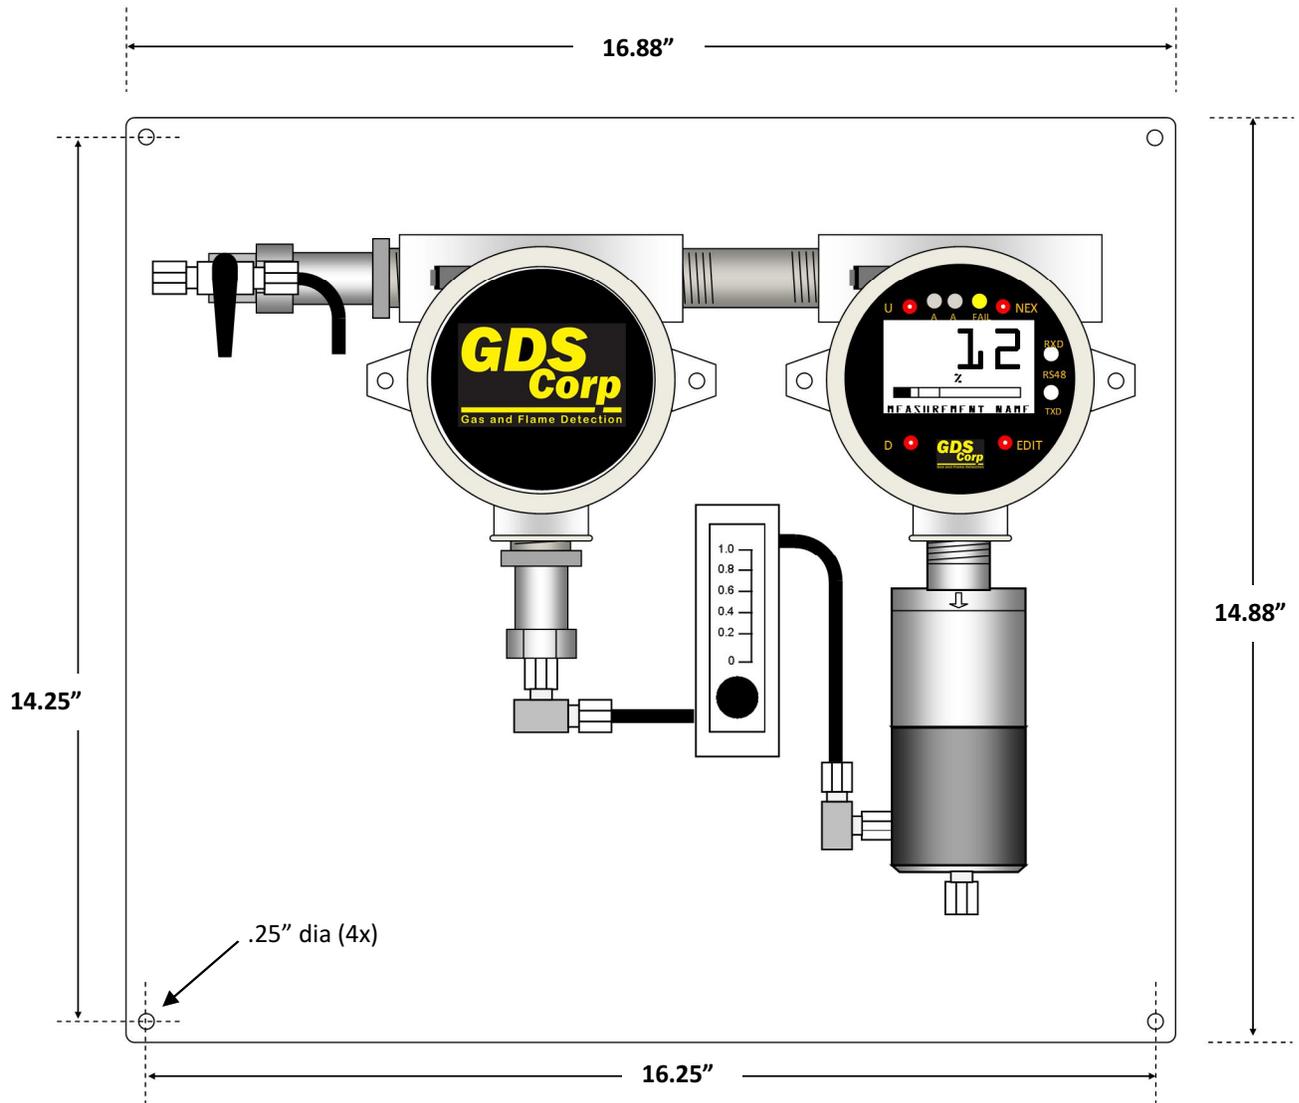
GDS-58XP 17" x 15" Mounting Plate Dimensions
